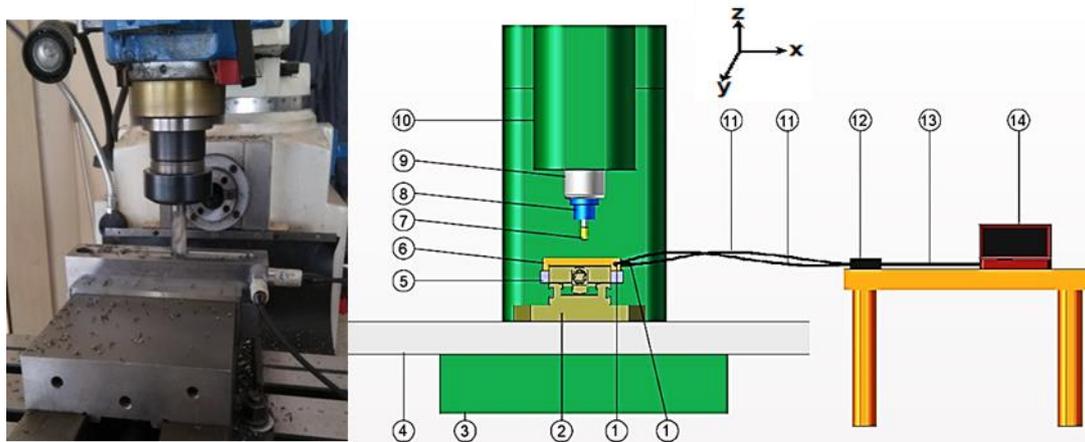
Experimental setup: 1-Accelerometer; 2- Vice; 3-Workbench Base; 4- Workbench Table; 5-Mount; 6- Workpiece; 7-Cutting Tool; 8-Tool Holder; 9-Spindle; 10-Bench Column; 11-Accelerometer Cable; 12-Data Acquisition Unit; 13-Connection Cable; 14-Computer
